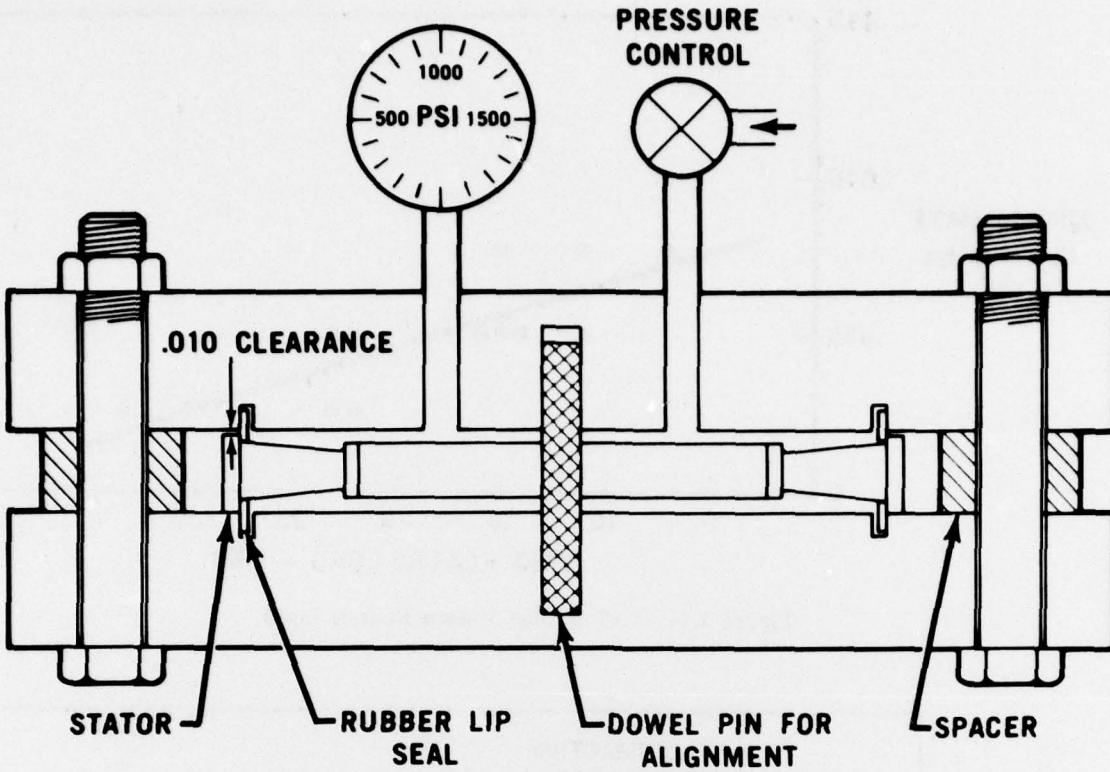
Stator Outer Shroud Pressure Test Fixture
